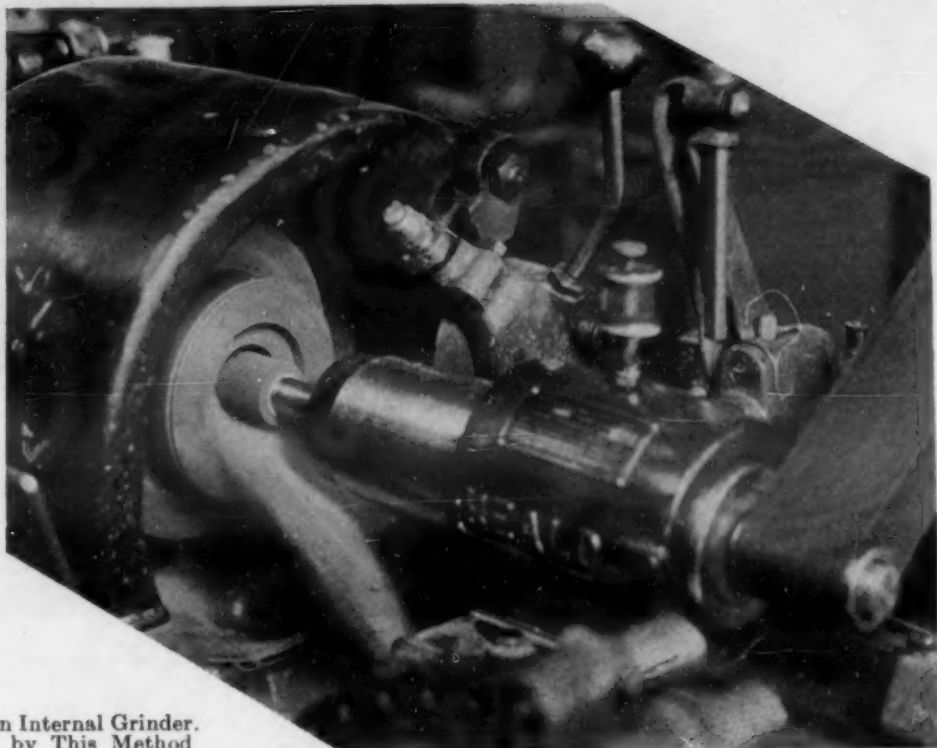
Grinding the Hole in a Work Piece with an Internal Grinder. Close Accuracy and Fine Finish Are Attained by This Method
